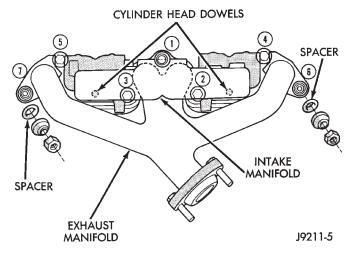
Intake/Exhaust Manifold Removal/ Installation—2.5L Engine
